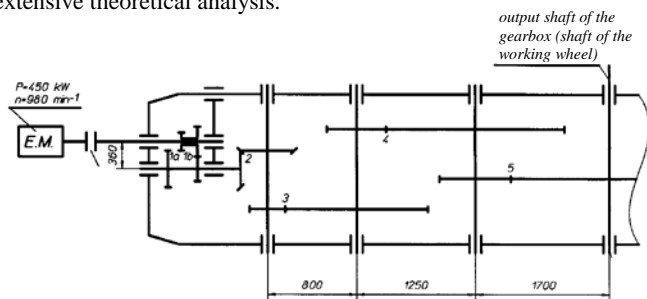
Schem of the gearbox (reducing gears) with the working wheel on the excavator SRs-630
